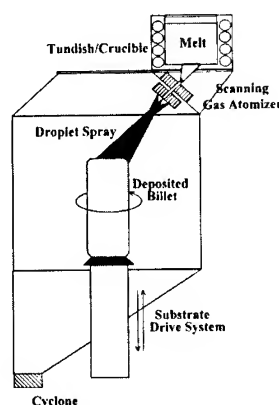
The schematic drawing of the spray casting apparatus used in this study.
